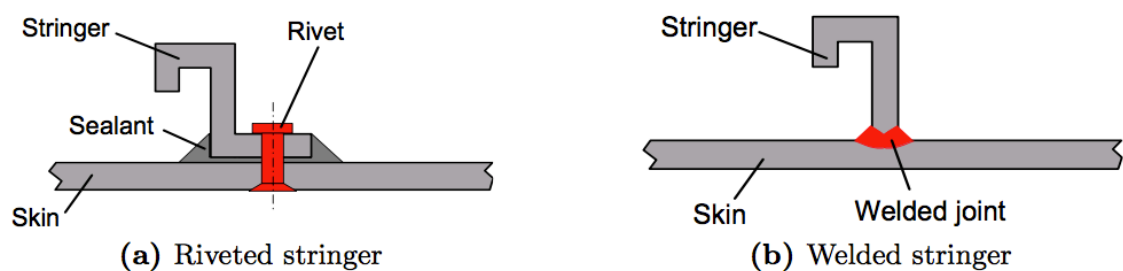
Riveted and welded stringer (3, p. 93)
